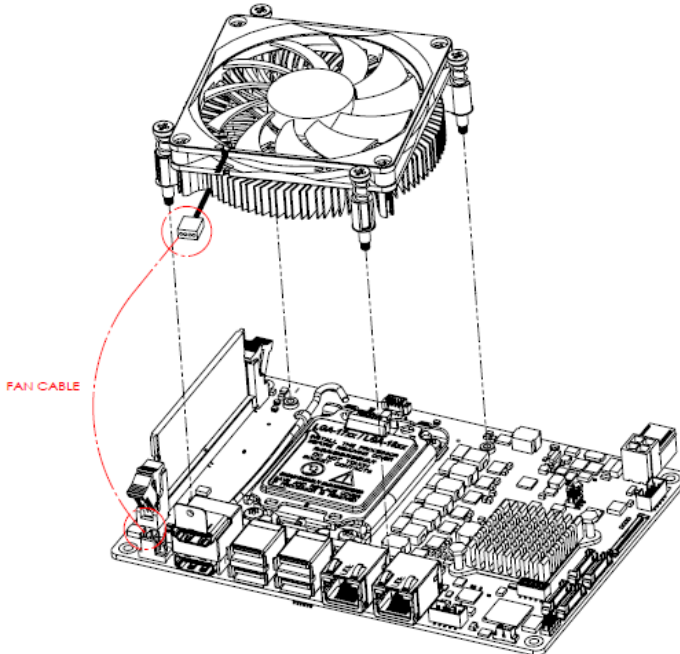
MIO-4370 Cooler Installation (*CPU Cooler is an Optional Accessory)
